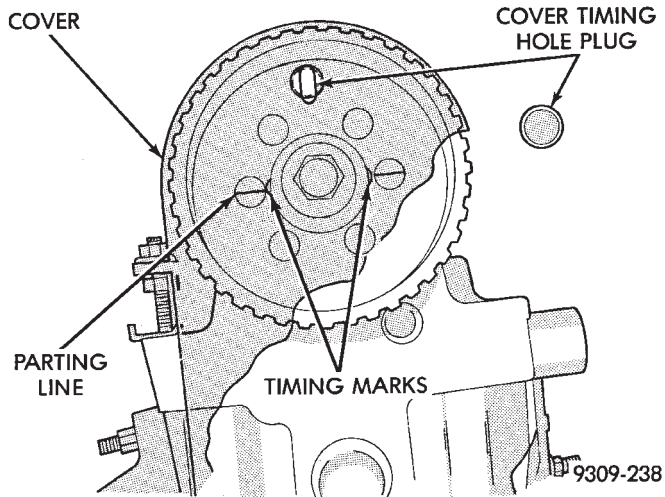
Crankshaft and Intermediate Shaft Timing
